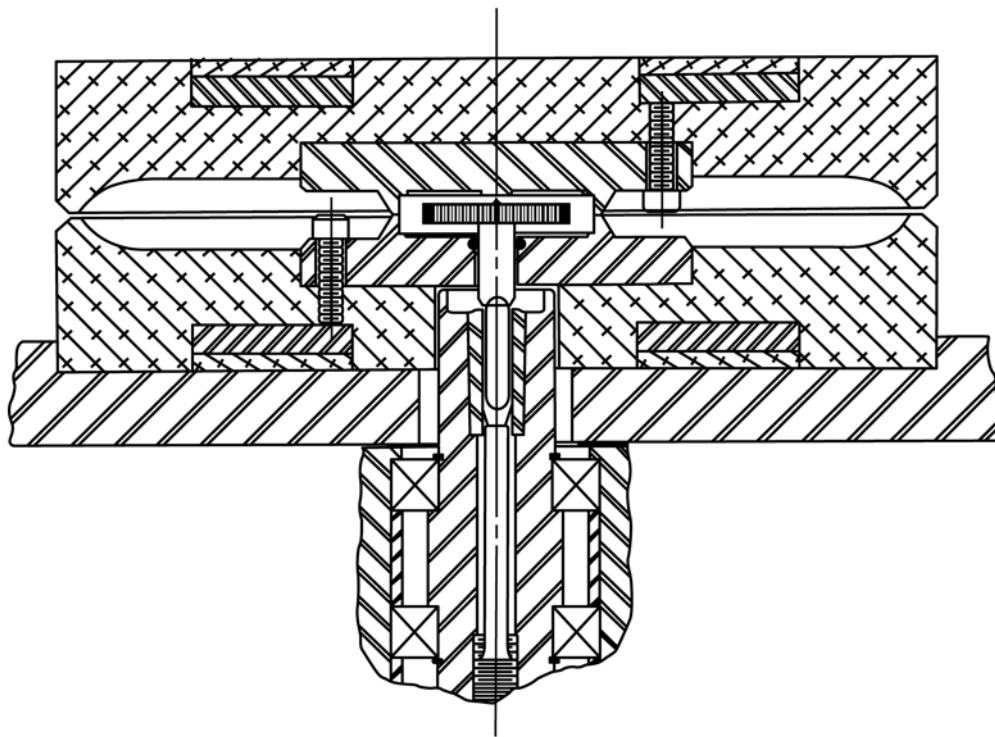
Relationship of Platens, Dies, and Rotor in a Typical Shearing Disk Viscometer
